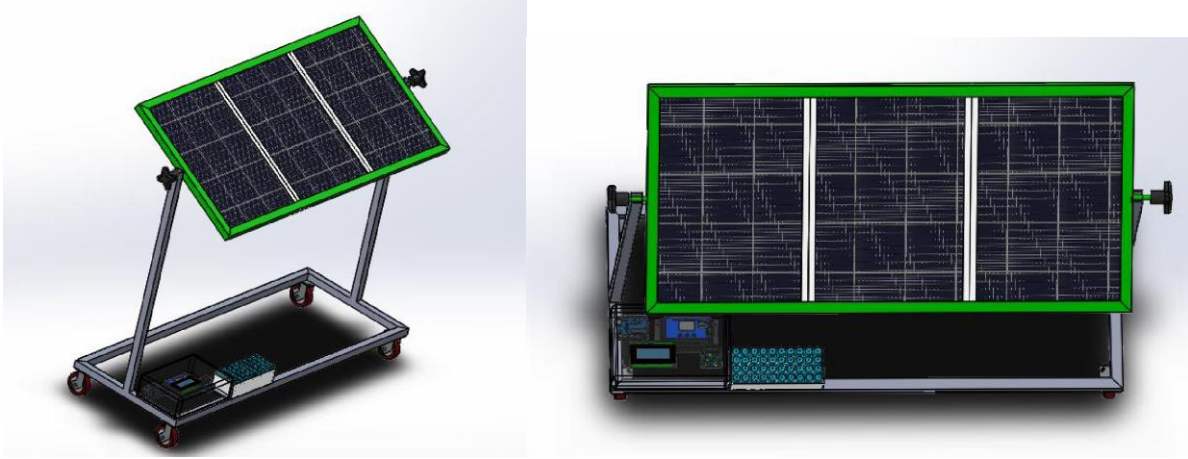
CAD solid model of the assembled solar charging station (Isometric and Top view).
